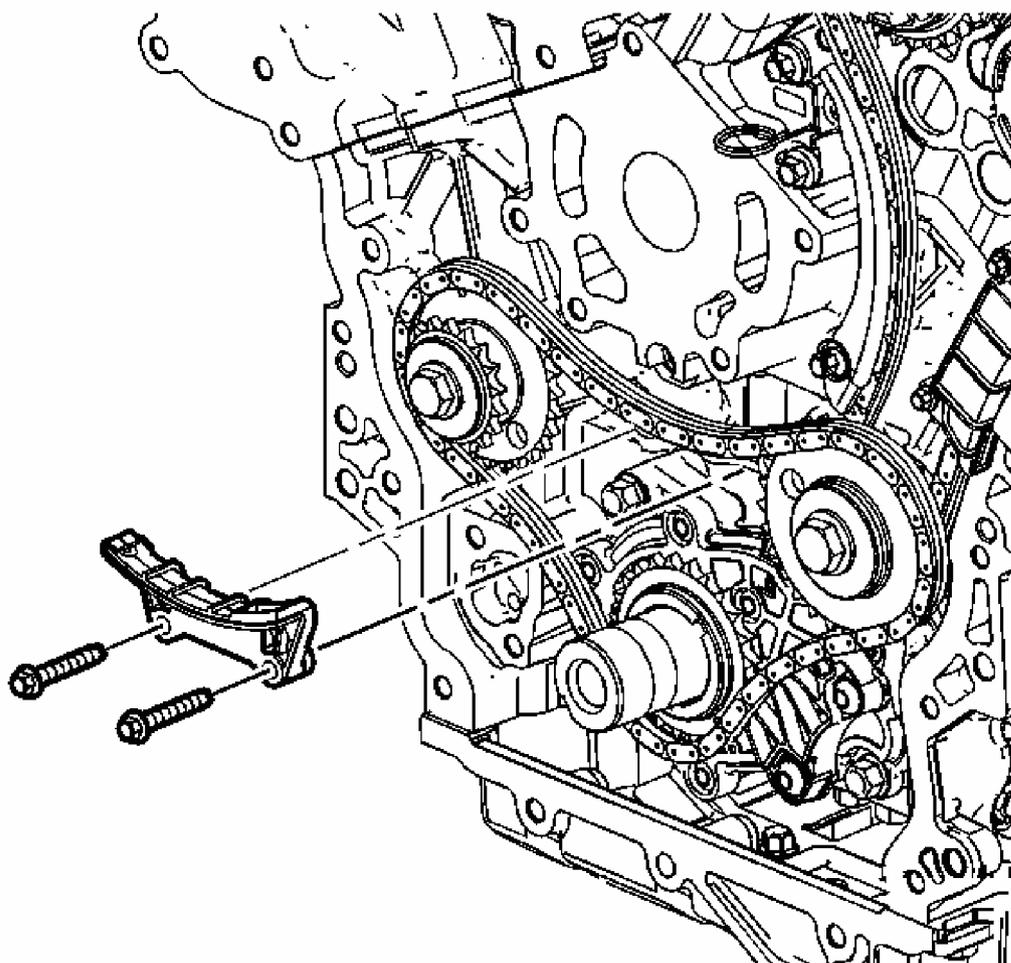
View Of Upper Primary Camshaft Drive Chain Guides
